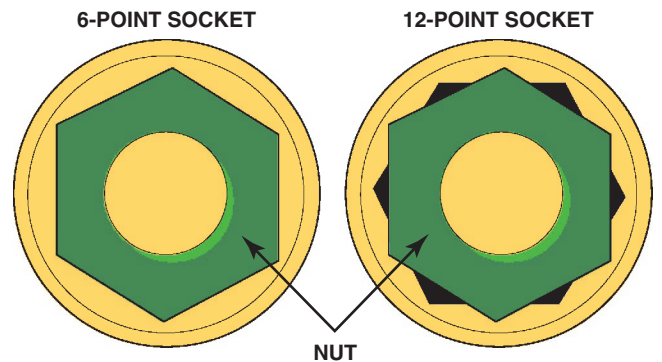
A 6-point socket fits the head of a bolt or nut on all sides. A 12-point socket can round off the head of a bolt or nut if great force is applied.
